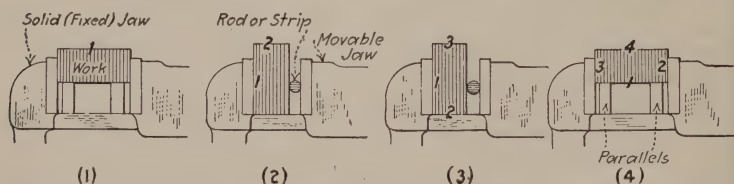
The four successive steps in planing the sides of a rectangular piece.
